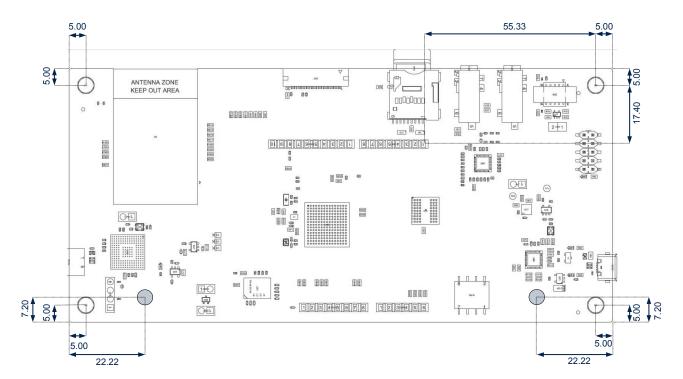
STM32H7B3I-DK board mechanical dimensions (bottom view, in millimeters)
